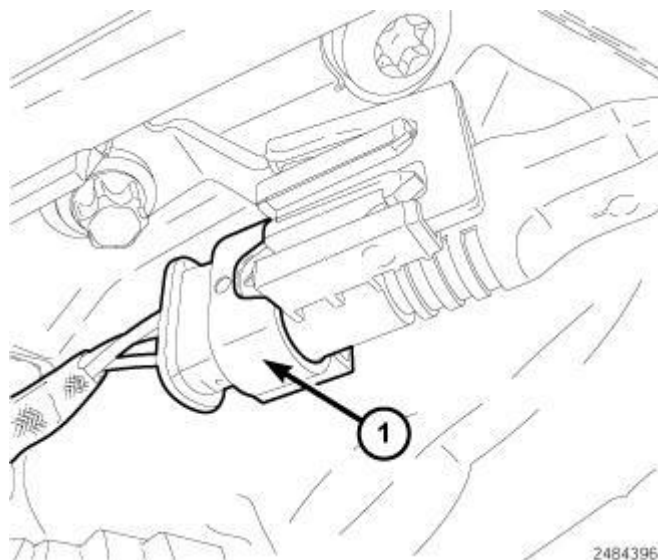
Vacuum Supply Line At EGR Solenoid
